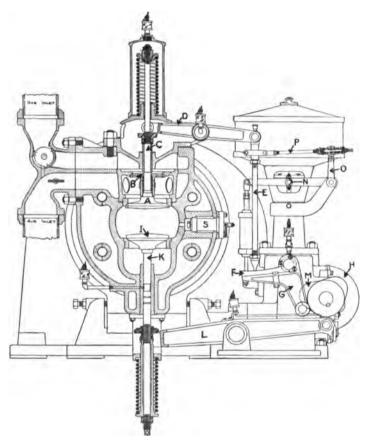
Otto Gas-engine — Section Through Combustion Chamber.
